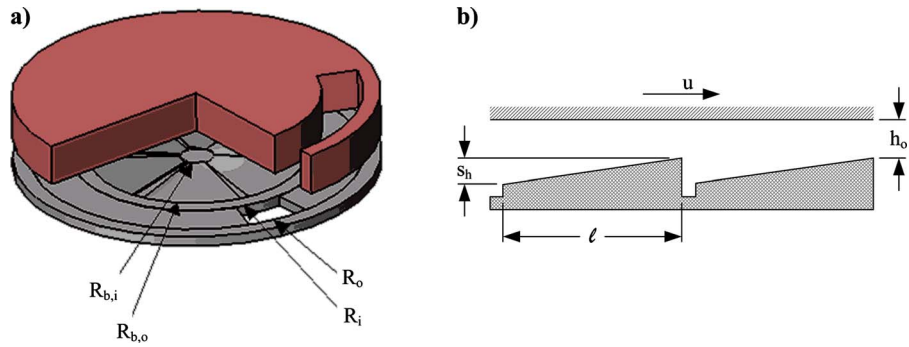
Thrust bearing schematic with defined dimensional variables. Through a cut-away in the valve disk, subfigure (a) shows the thrust bearing pads as arranged on the inside of the valve ports. Subfigure (b) gives dimensions for the fixed-incline thrust bearing pads.
